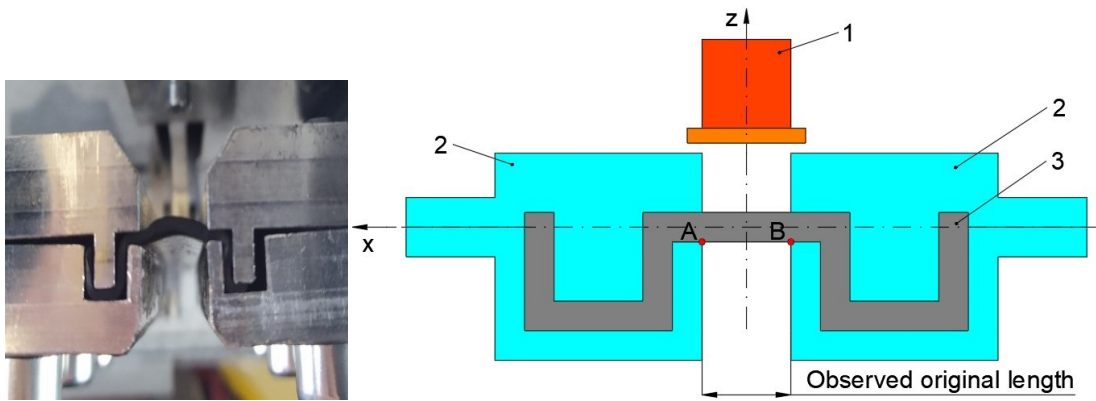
Picture of special ISA clamps (left); scheme of clamped flat sample: (right)
